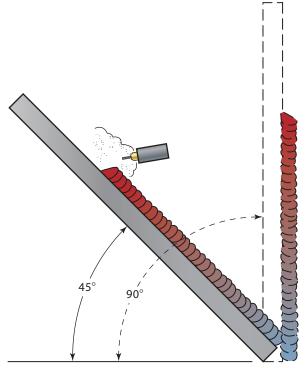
Start making welds with the plate at a 45° angle. As your skill develops, increase the angle until the plate is vertical.
